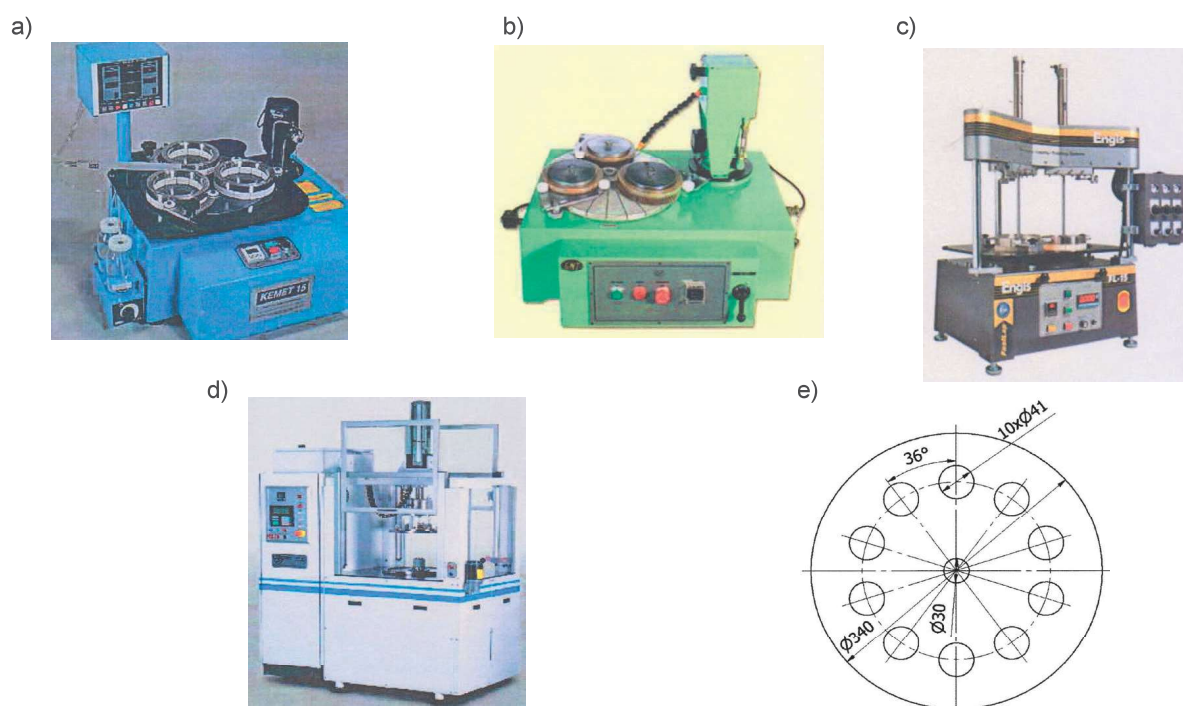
Single-disc lapping machine: a) model 15 produced by Kemet [6], b) model 06-01 produced by GMT [5], c) model FL-15 produced by Engis [4], d) model LSP-6 produced by Lapmaster [7], e) sample separator
